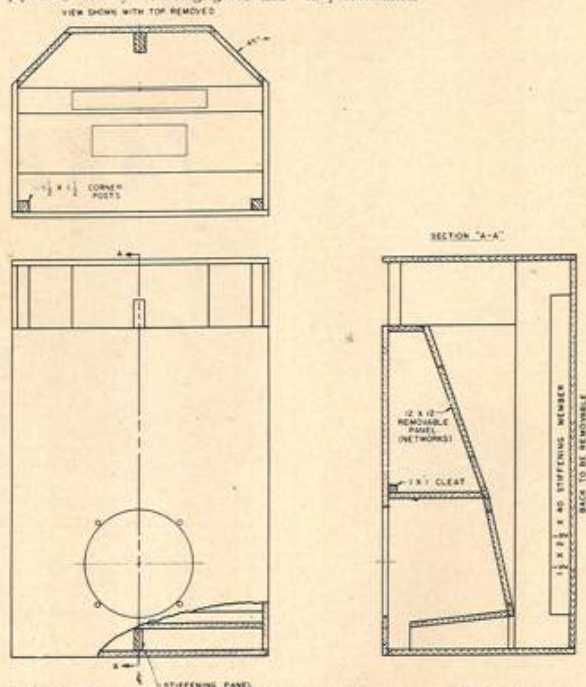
Constructional drawing of the RS-100 enclosure. Dimensions are omitted in the interests of simplification, but the drawing is to scale—1/16 in. = 1 in.
